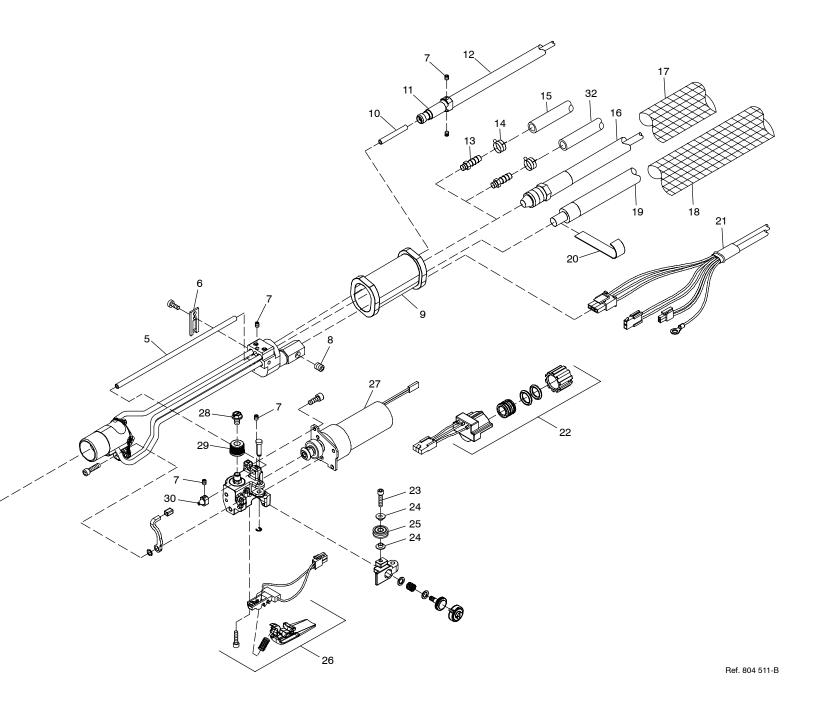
Exploded View Of XR-A Aluma-Pro Gun
